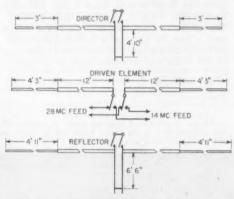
Final arrangement with stub dimensions. Center sections are all of 1×0.049 -inch 61ST tubing. Extensions are all of 74×0.035 -inch 61ST tubing. Over-all lengths of adjustable sections are 5, 6, and 7 feet, respectively, for the director, driven element, and reflector.
